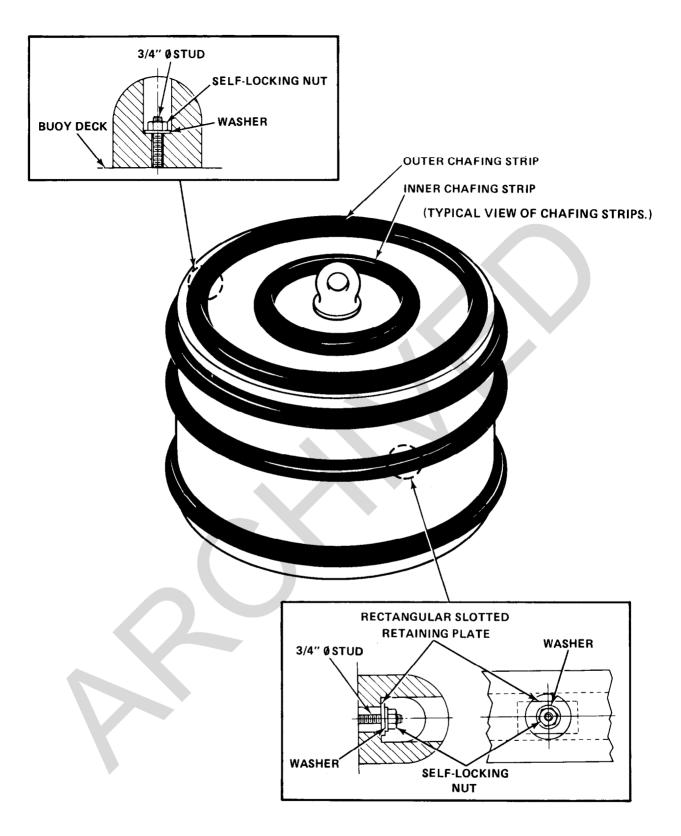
Recommended Installation of Fenders on Fleet Mooring Buoys
